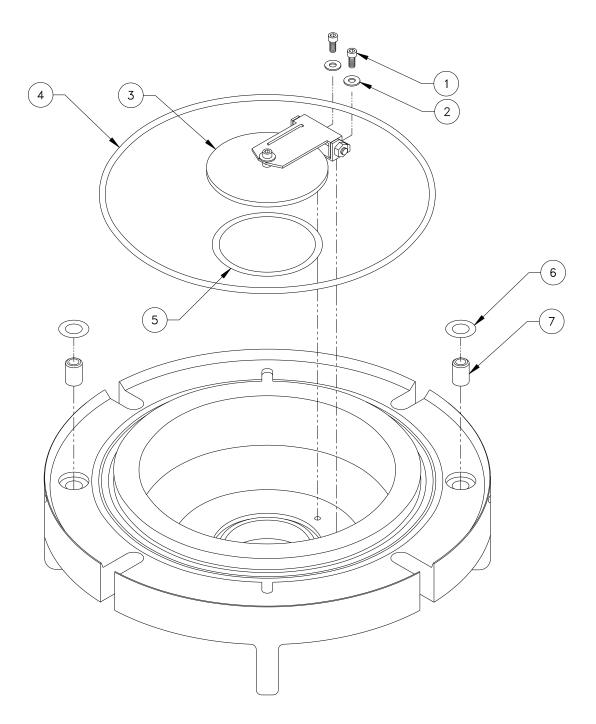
PF2480 TANK COVER ASSEMBLY
